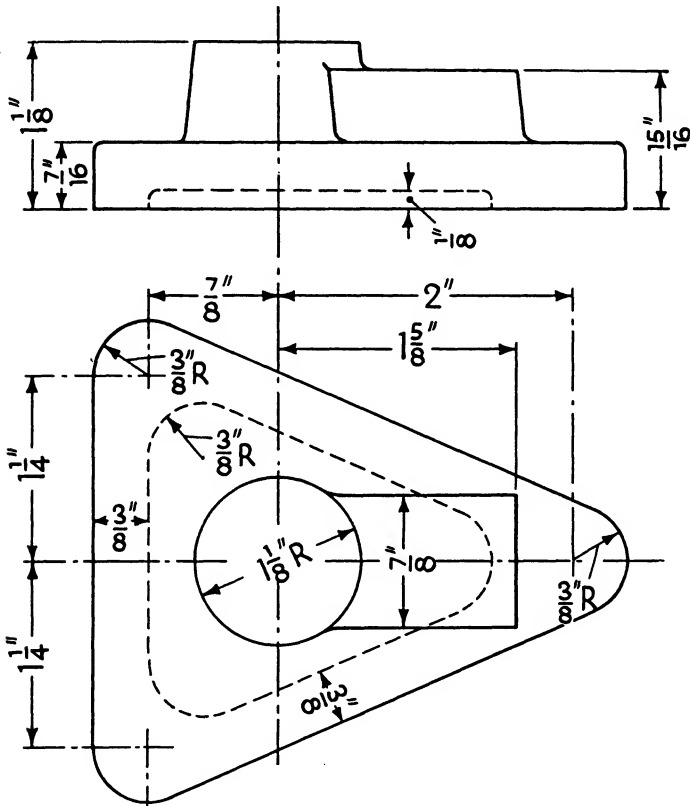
CASTING FOR COMPONENT IN FIG. 96, PRIOR TO MACHINING
